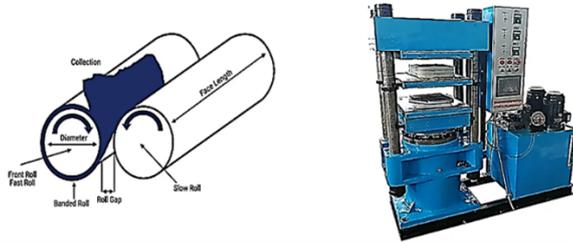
Experimental facilities used in this work, (a) The rolling machine; (b) The thermal press machine.
